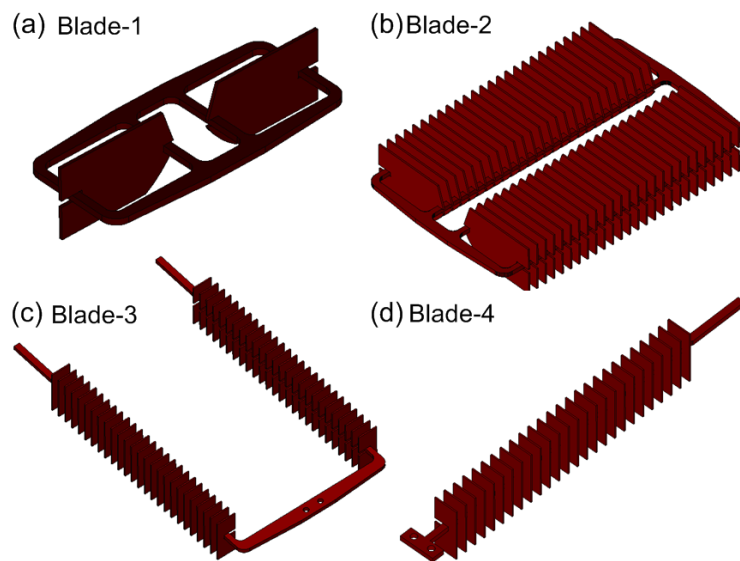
Carbon fiber blade structures, (a) one array with long blades, (b) 26-blade array with long blades, (c) 26-blade array of short blades with U-shaped drive frame, (d) 26-blade array of short blades with I-shaped drive frame.
